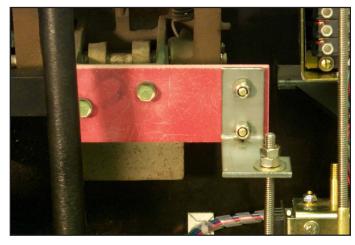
Trip Bracket Assembly and Trip Rod Installed in the Breaker.
